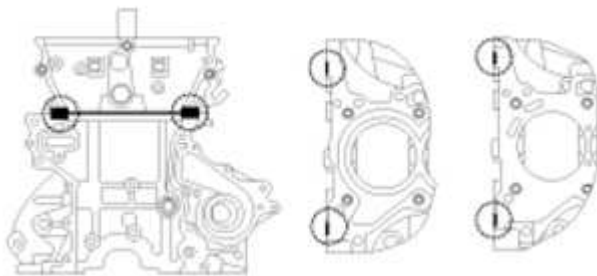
Applying Liquid Gasket On Edge Of Cylinder Block
